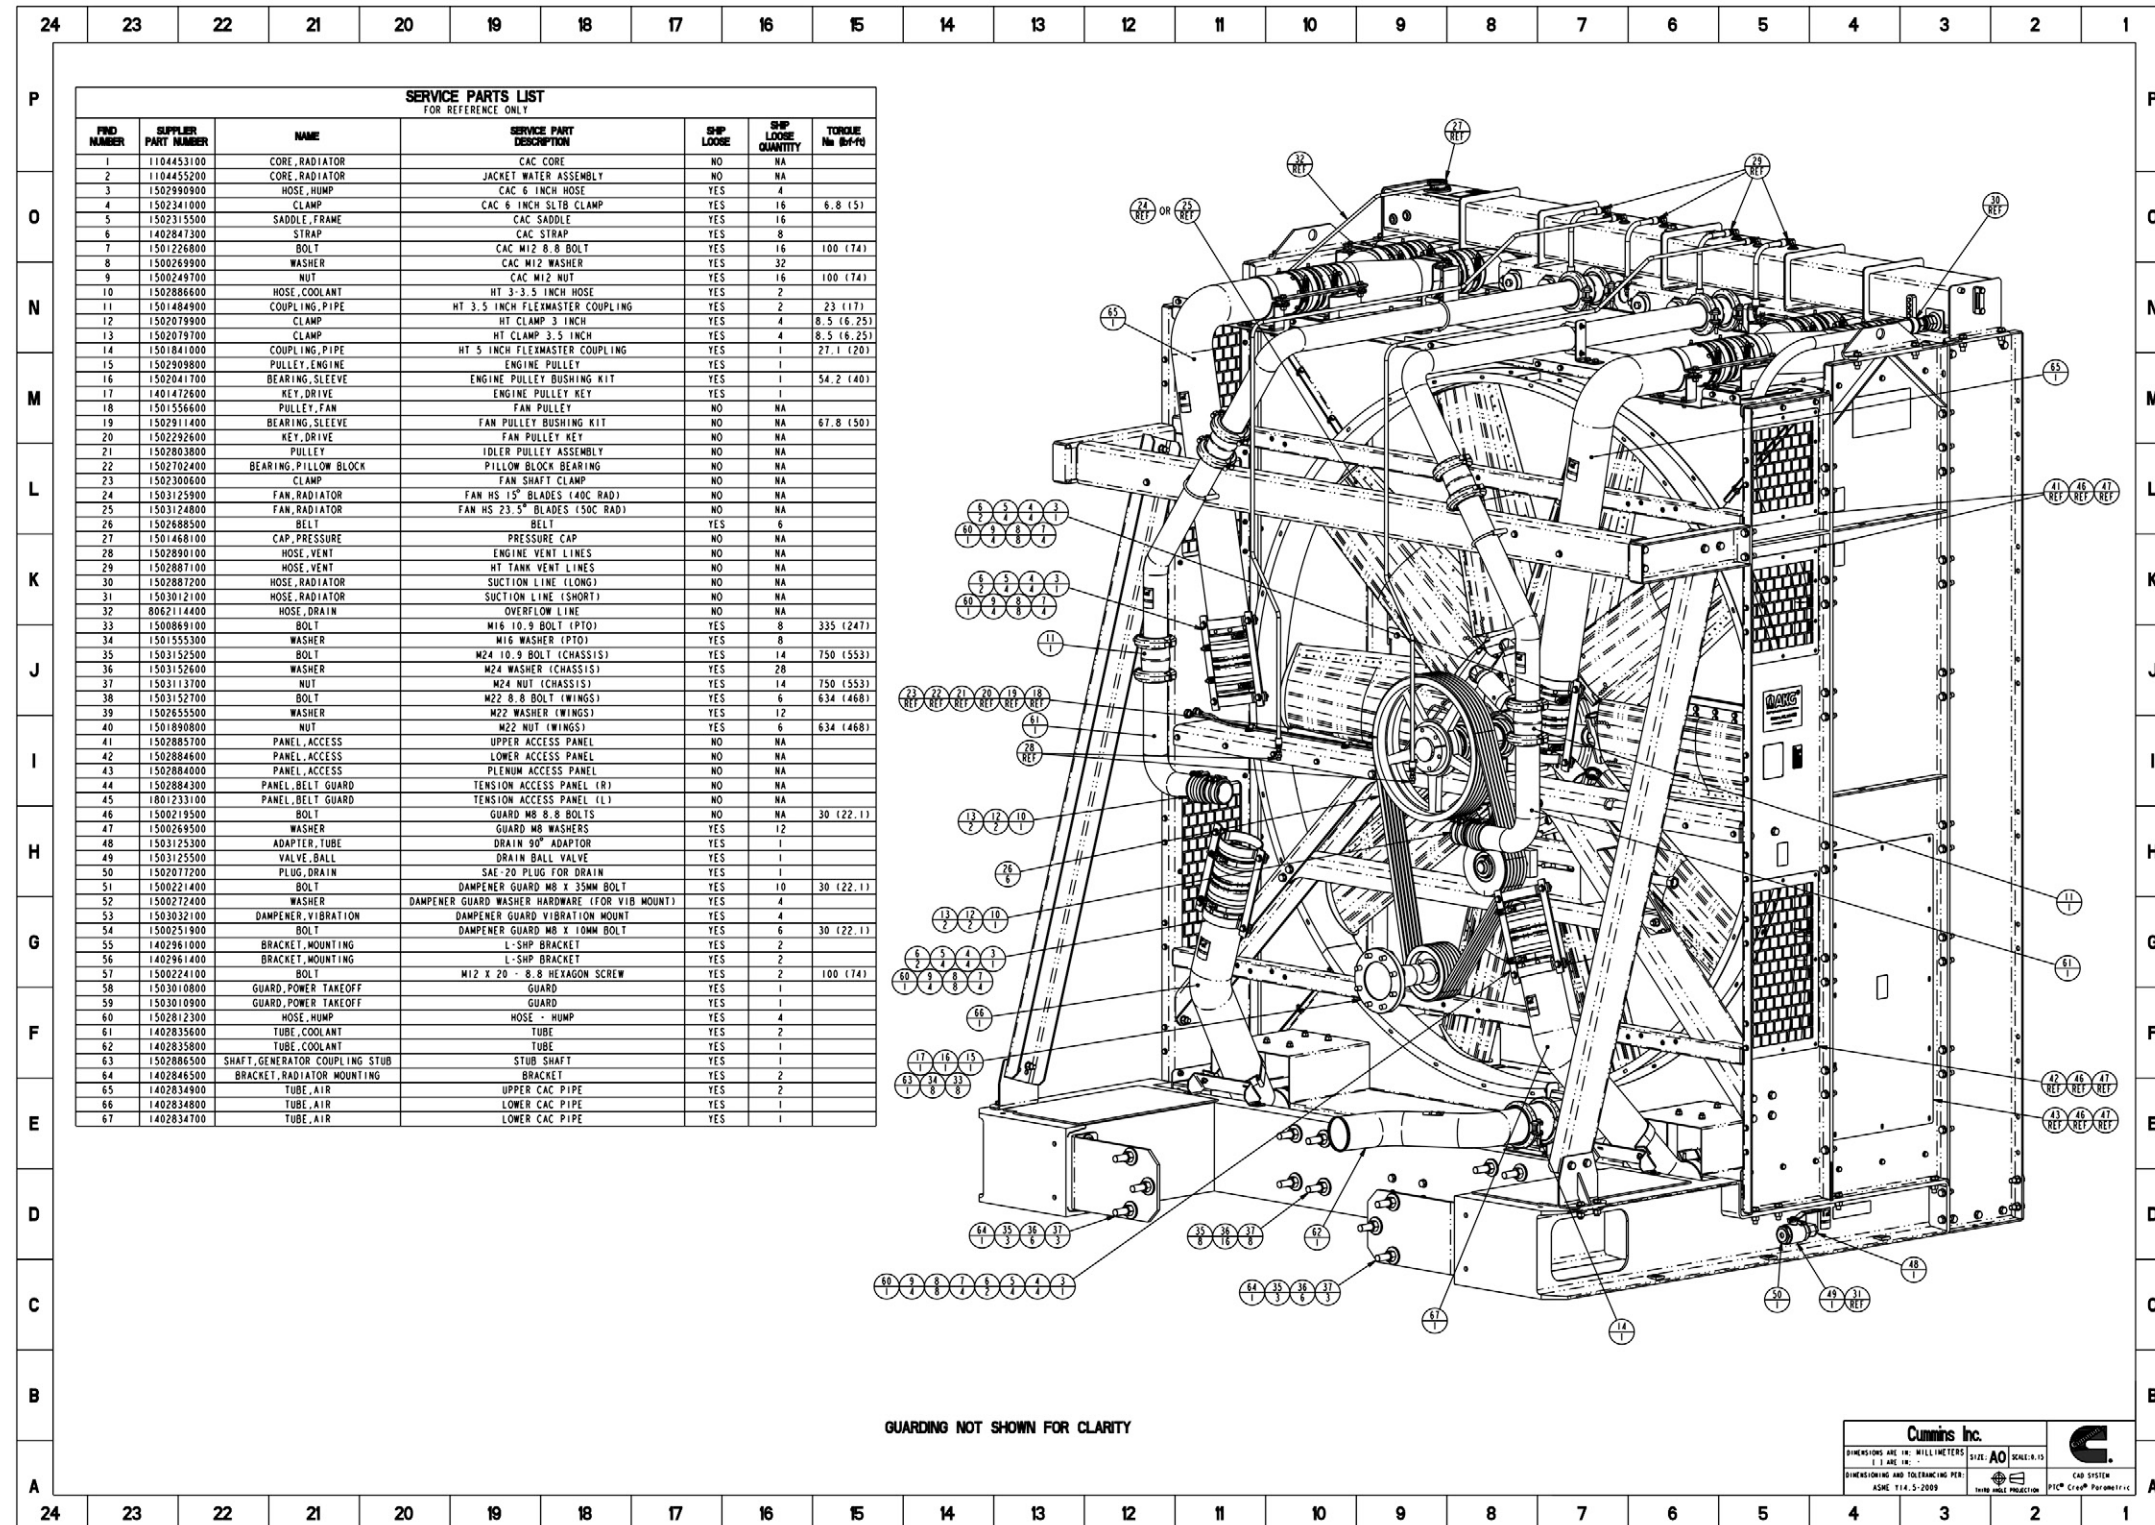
OUTLINE DRAWING (SHEET 1 OF 1)
